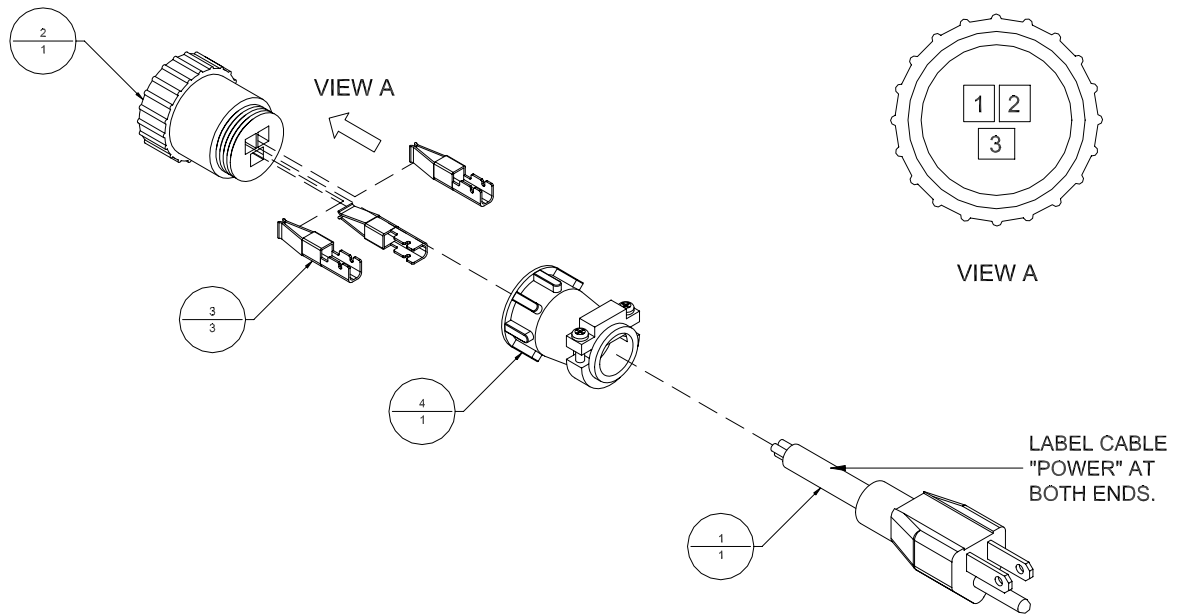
Power Cable Assembly, Tabber (614104A)
